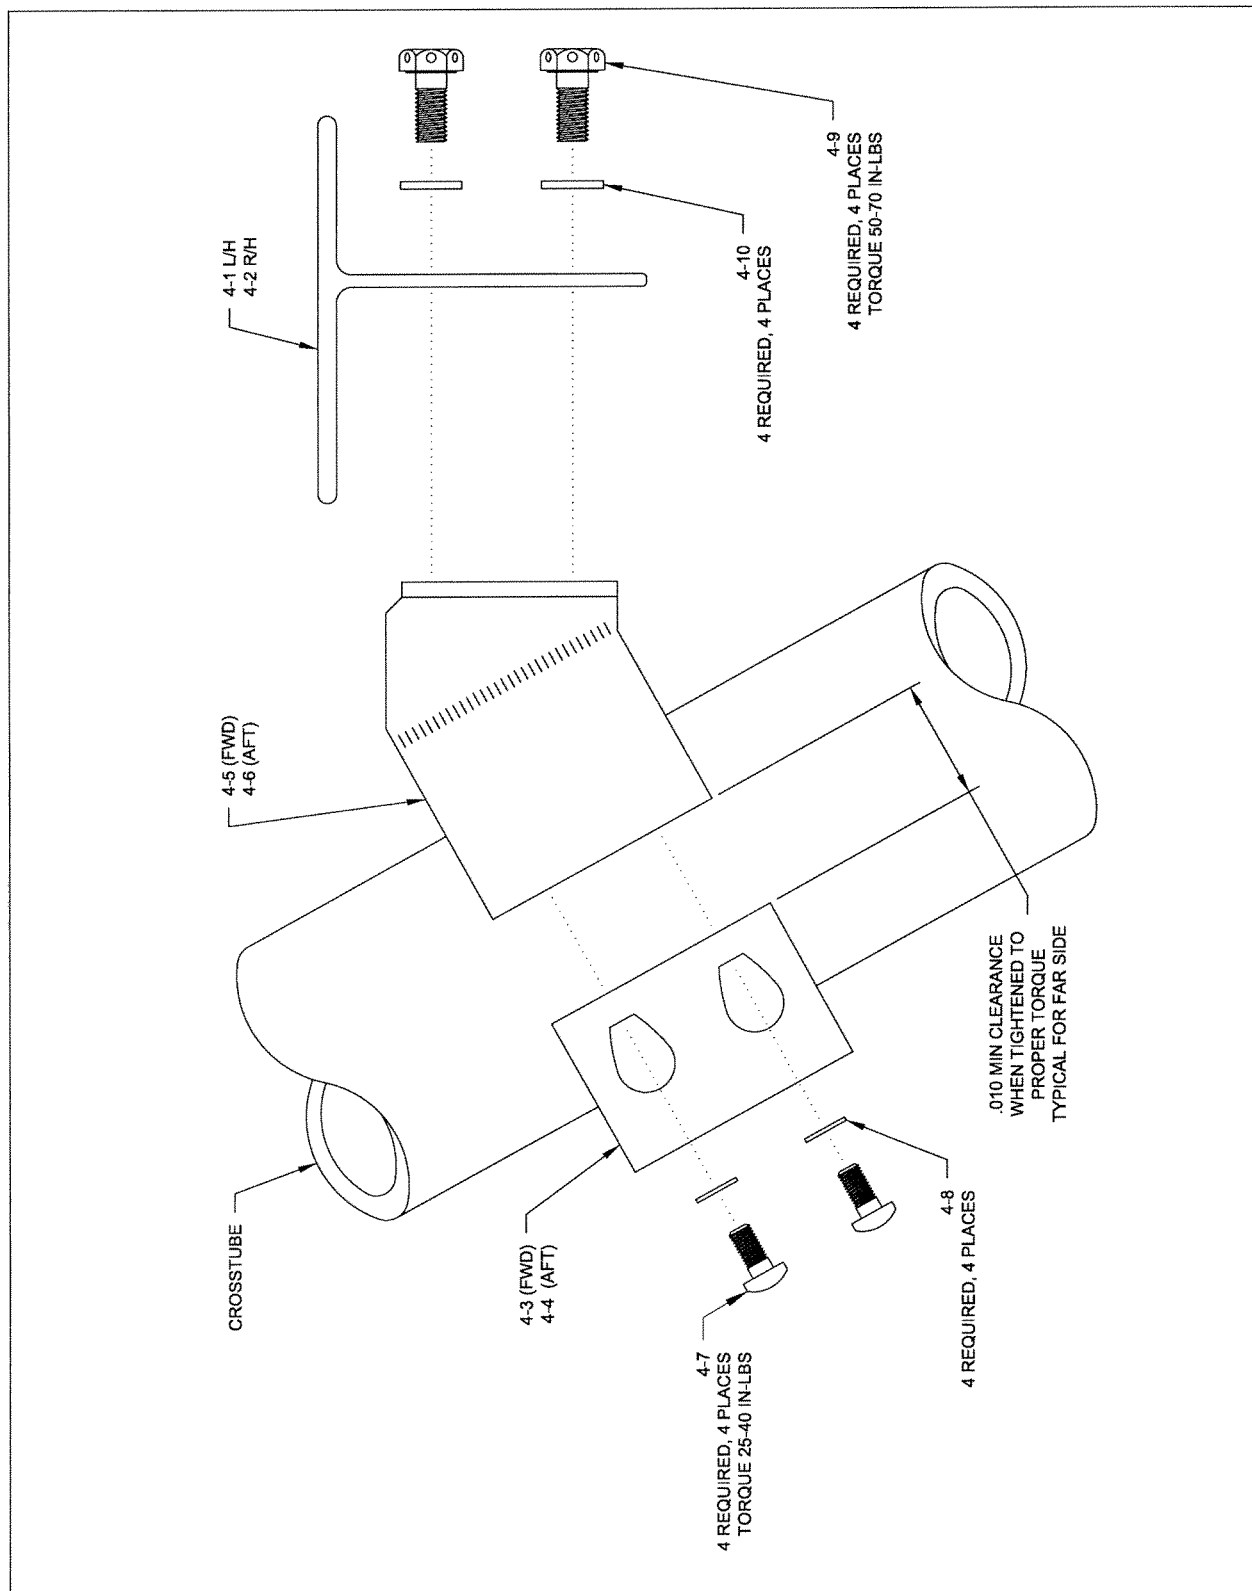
FLITESTEP® ASSEMBLY (206-322-101)
